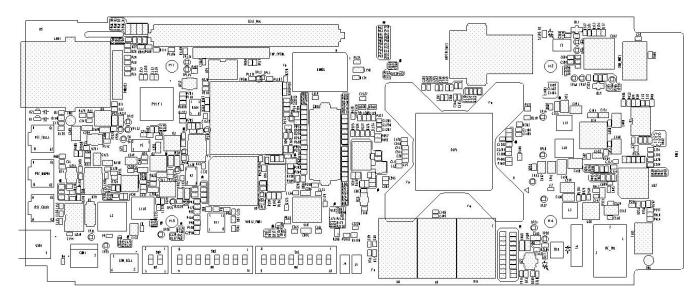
C6657 Lite EVM Board Assembly Layout - TOP view
